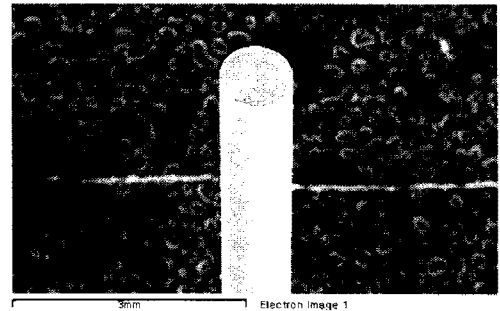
Wire fracture after shape of the 9th pass for the redesigned drawing process
